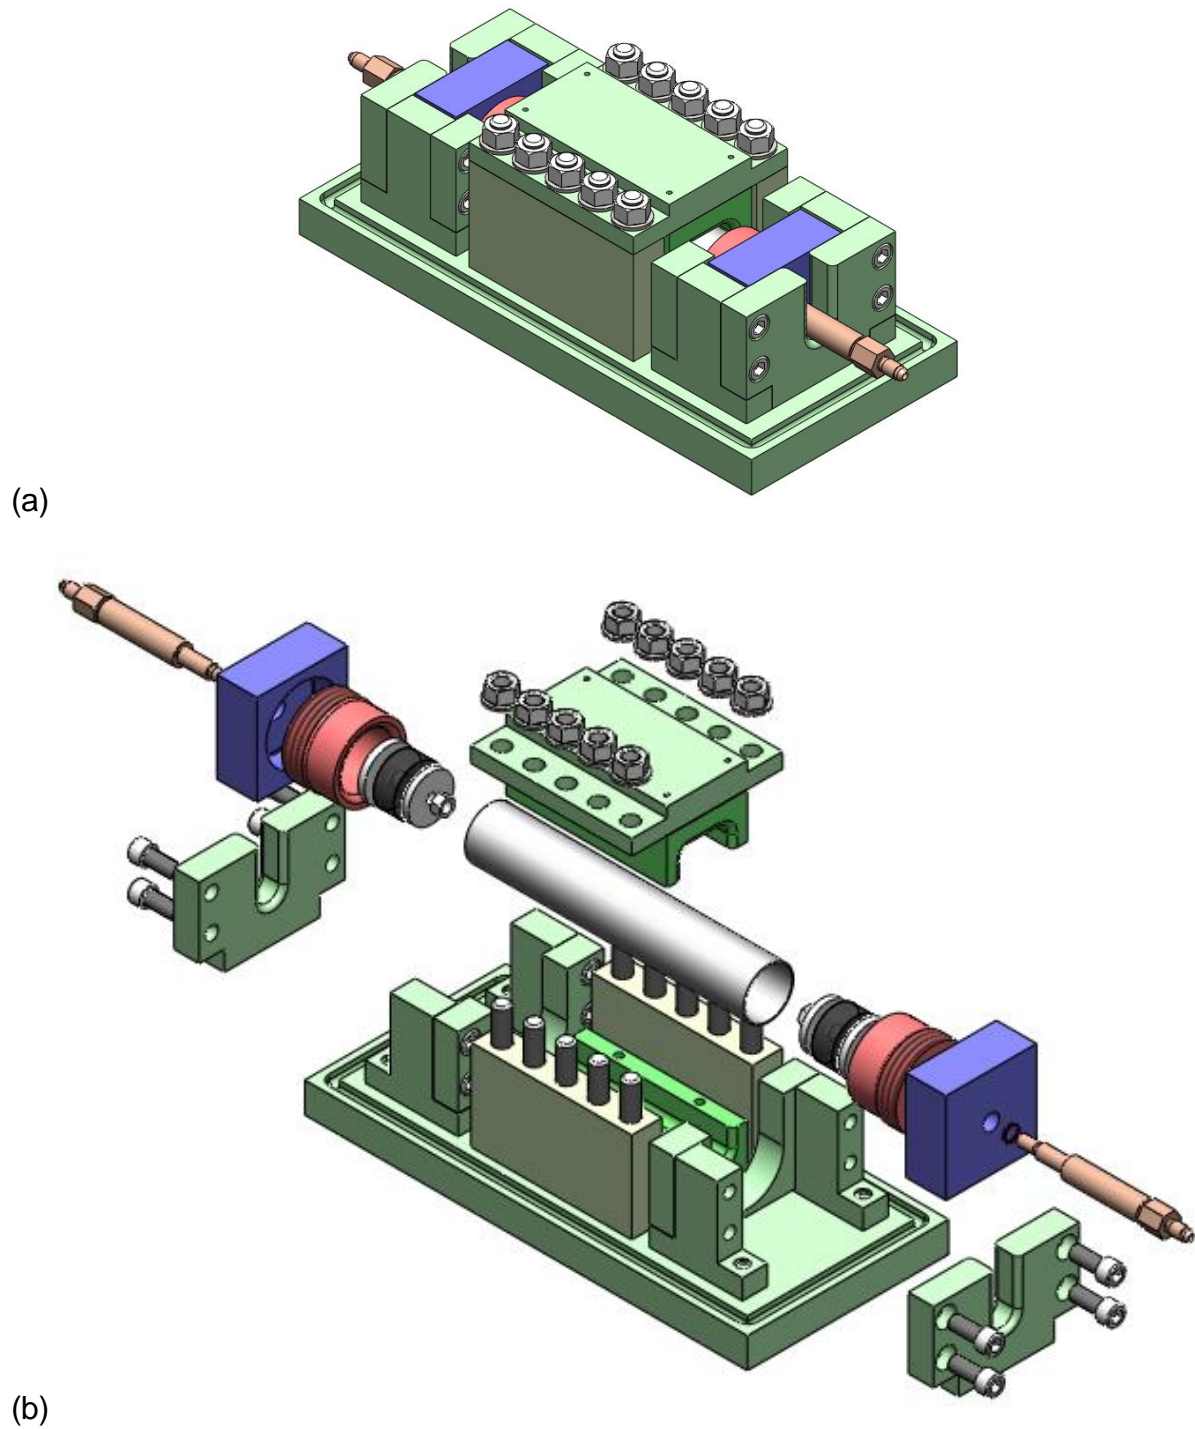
Overview of the UNH Tube Hydroforming machine
